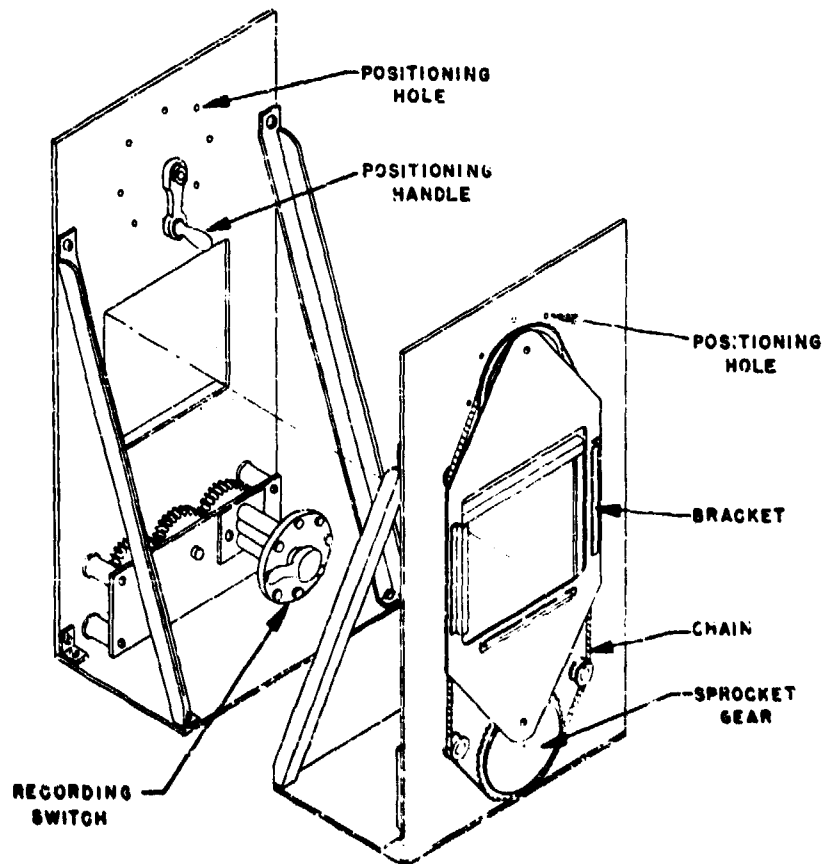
Mechanism for locating opaque spot in Projector A in eight eccentric positions. Two views, showing parallel displacement mechanism, positioning handle and indicating switch.
